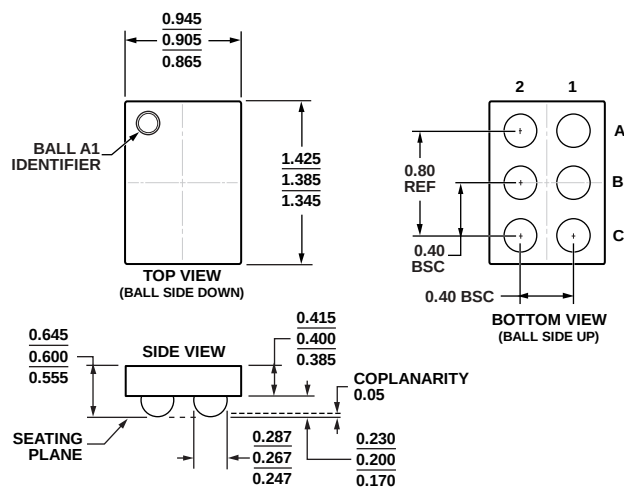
6-Ball Wafer Level Chip Scale Package [WLCSP]
